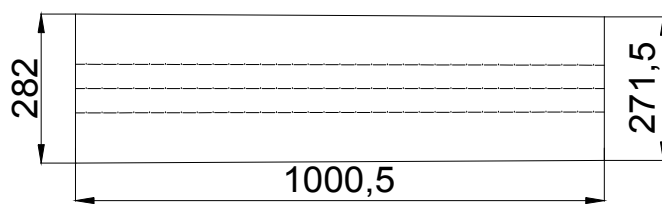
Laser drawing for SRSA (Source: Own drawing)
